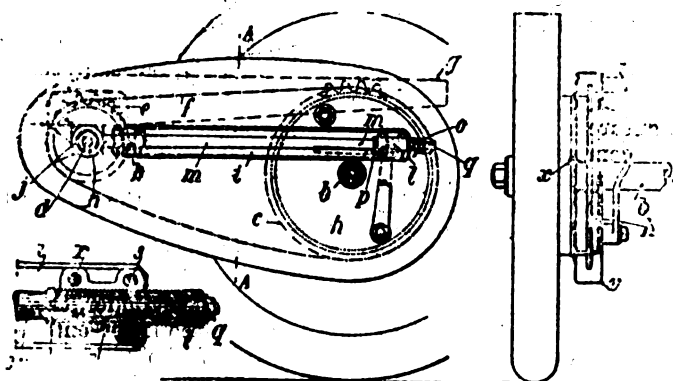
Details of New Radius Rods and Chain Adjustment on Peugeot Cars.
